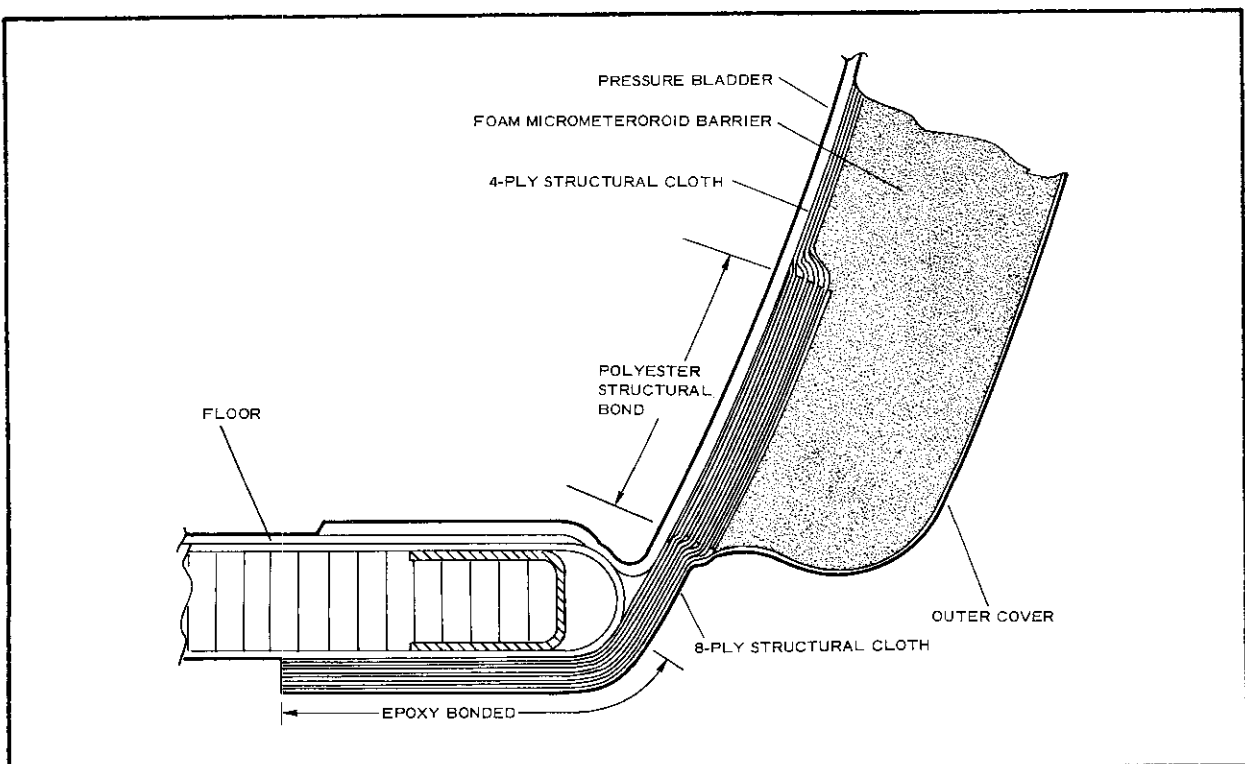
Structural Joint Between Expandable Wall and Rigid Floor
